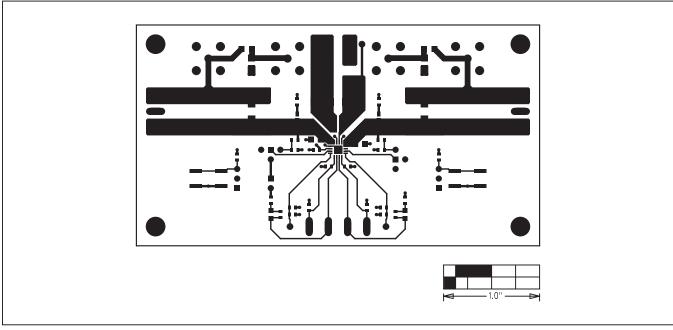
MAX16948 EV Kit PCB Layout—Component Side
